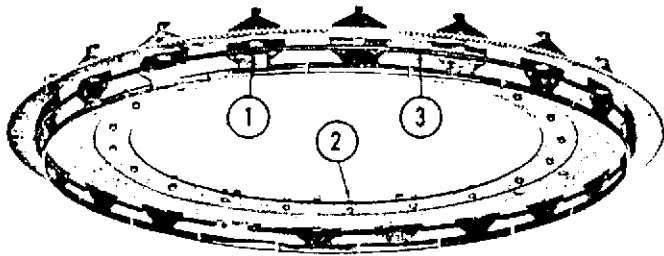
ROTATING PLATE AND ROCKER ASSEMBLY 68245
